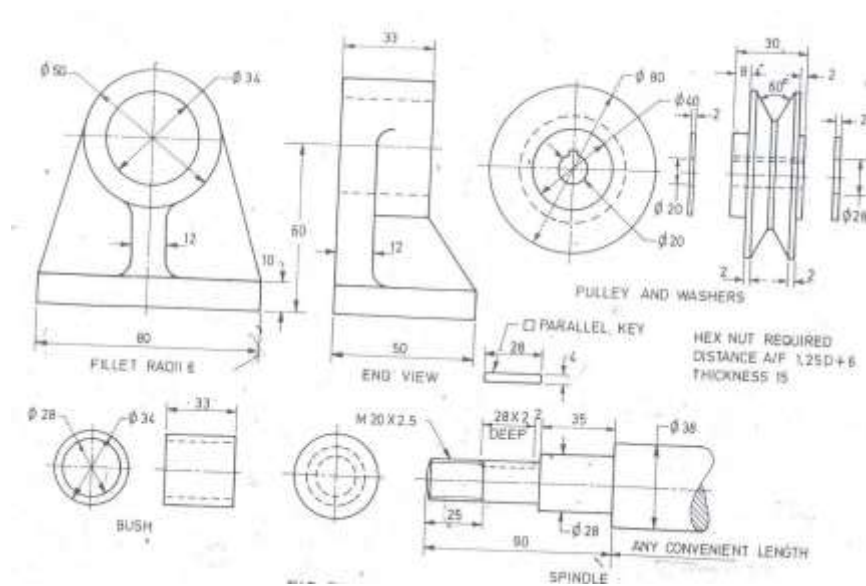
shows parts of PULLEY BLOCK assembly. Assemble the parts and draw FULL SIZE in First angle orthographic projection, the following views;
